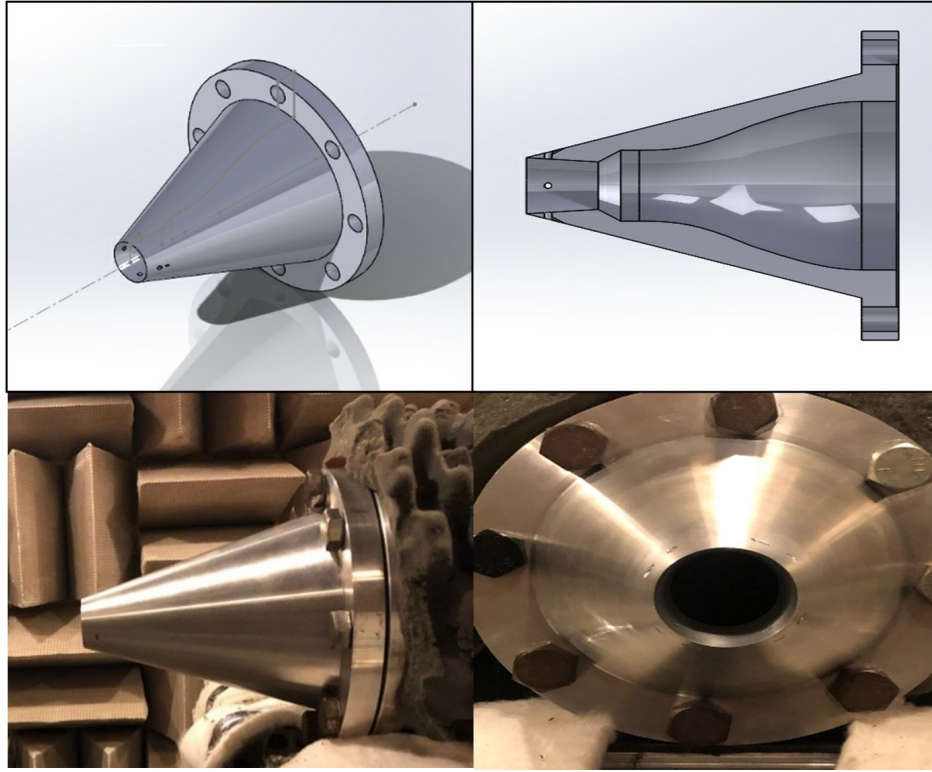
Isometric view of SolidWorks Nozzle (Top Left); Cut View of SolidWorks Nozzle (Top Right); Side View of Nozzle (Bottom Left); Front View of Nozzle (Bottom Right).
